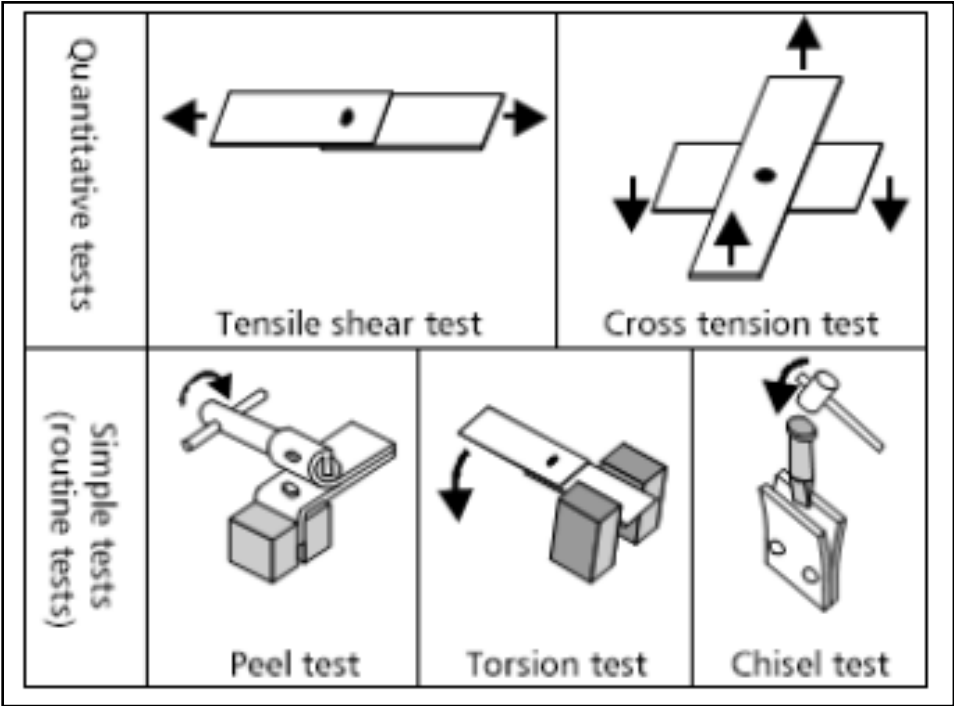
Testing methods of resistance spot welding [13]
